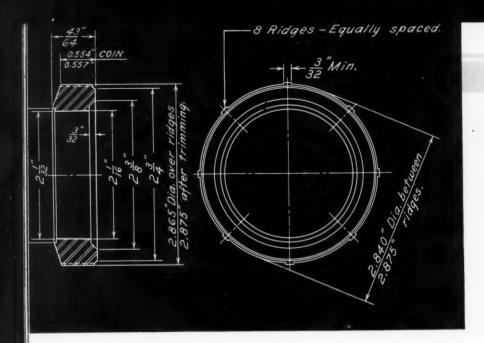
Detailed Dimensions of the Bearing Lock Sleeve which is Formed Directly from Steel Chips
